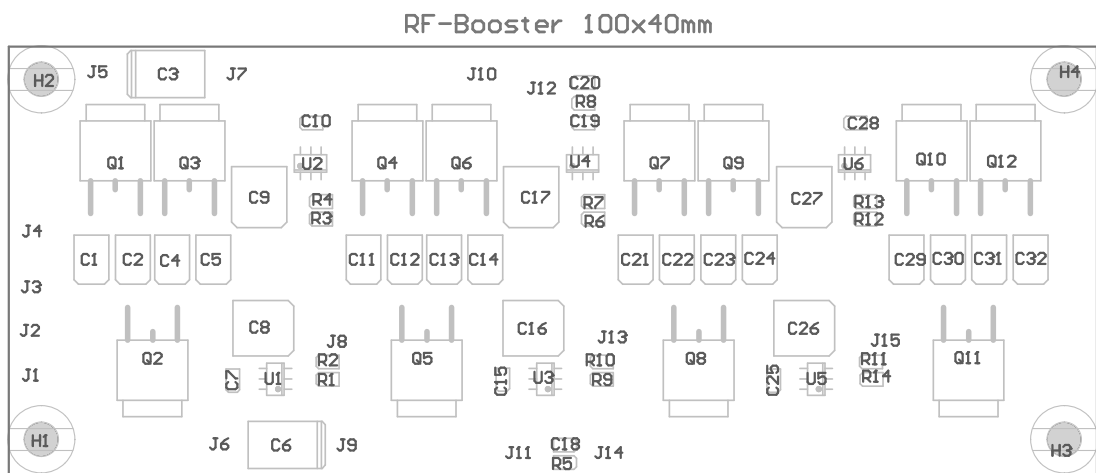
PCB layout of the RF booster’s signal boosting board.
